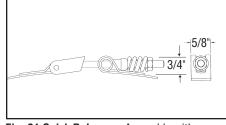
Quick Release – Assembly with Spring Loaded Screw – Assembly Welded to Sheath with 1/4-20 screw
